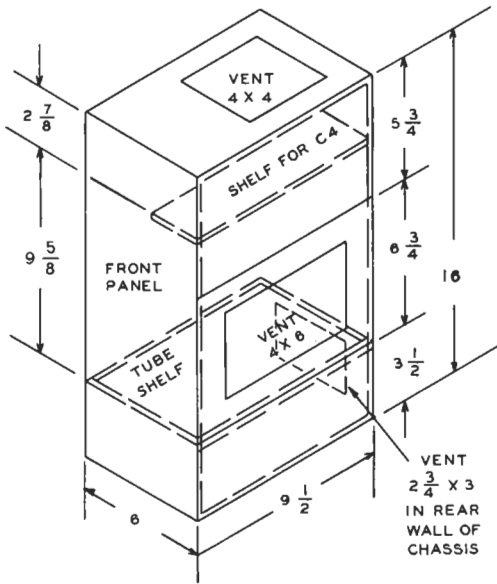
CABINET DRAWING for the mobile linear amplifier. This cabinet was fabricated from $\frac{1}{8}$ -inch thick sheet aluminum, with flanges for side shields.
